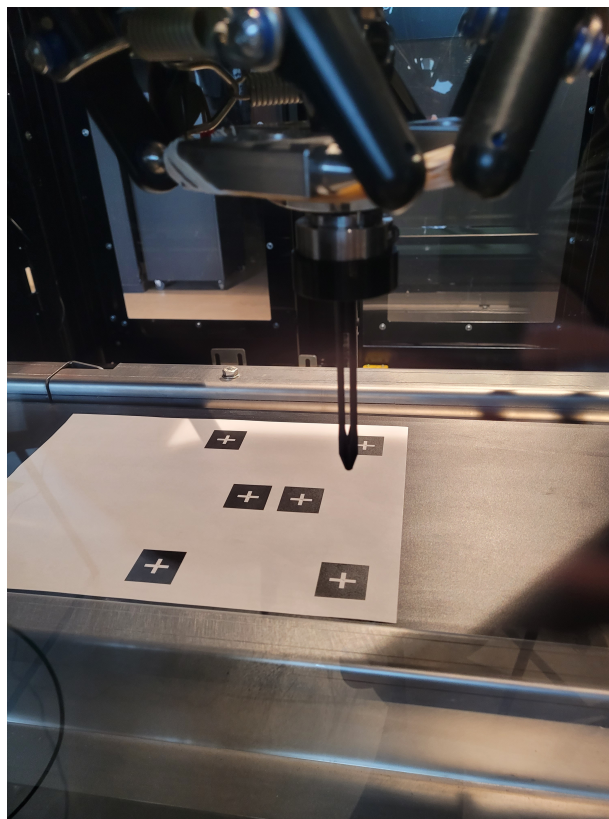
Photo of the pointer fastened on the TCP of the pick and place machine. The sheet of paper is underneath the conveyor.
